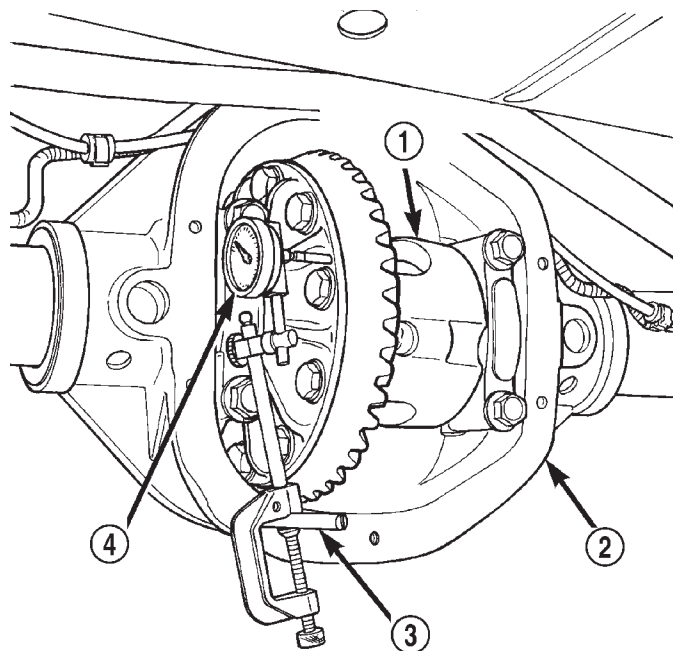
SEAT RING GEAR SIDE DUMMY BEARING
